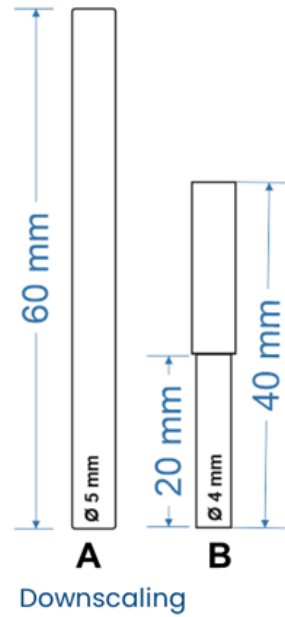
Illustration of the aluminum rivets: A) 5 mm and B) 4 mm diameter.
